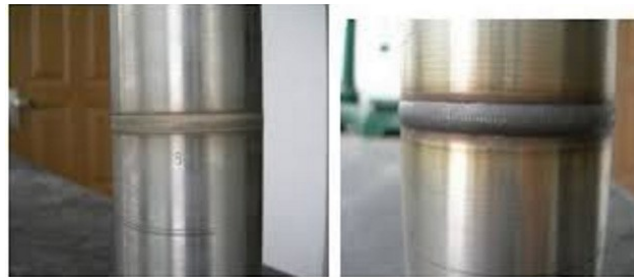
TIG Welding Process Used in Pipe welding.
